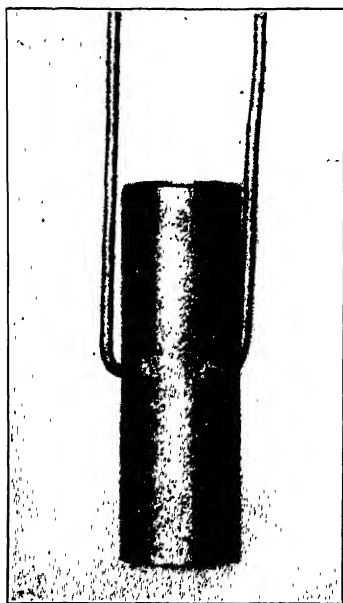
THERMOCOUPLE WIRES WELDED TO THE SPECIMEN FOR QUENCHING RUNS.
